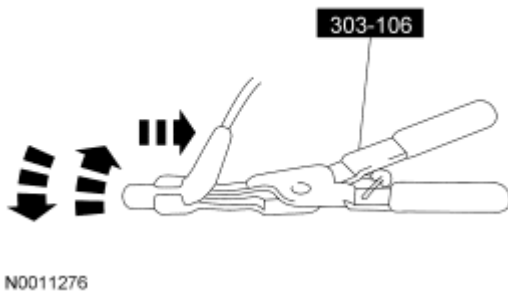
Removing Spark Plug Wire From Spark Plug Using Special Tool (303-106)
